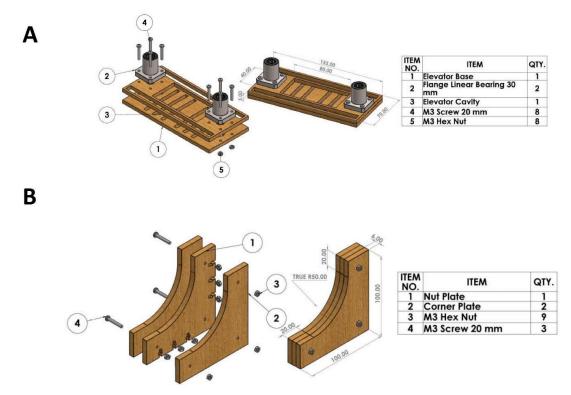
Detailed assembly for corner and elevator set. (A) shows the elevator set assembly and the cavity were the sample under test is placed as well as (B) shows the proper assembly of the corner set using screws and nuts.
